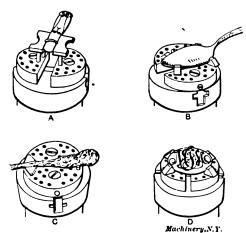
The Way in which Irregularly Shaped Pieces are held by the Auxiliary Attachments
